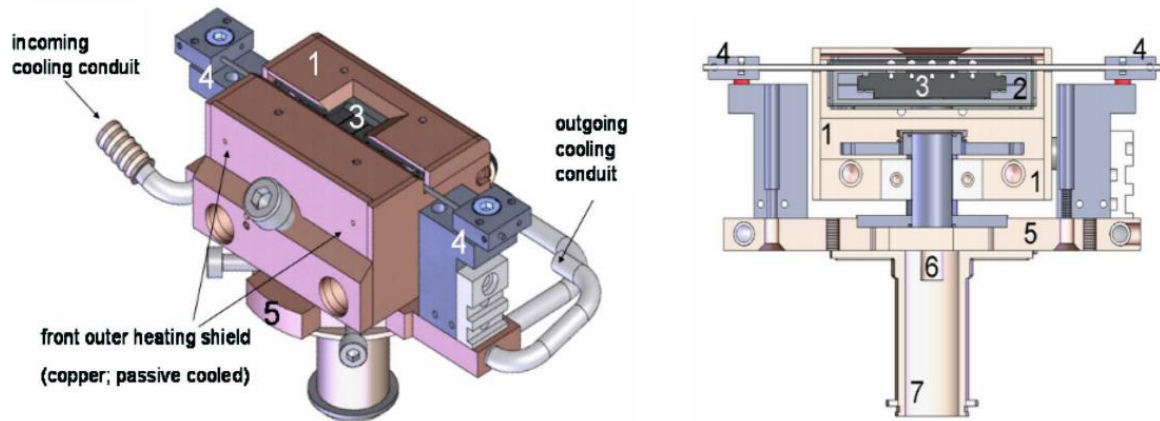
Laser powered heating stage showing the basic outer parts and a cross section of the interior showing: (1) rear outer copper heating shield, (2) internal tantalum heating shield, (3) silicon carbide sample holder, (4) tungsten clamp for specimen mounting, (5) heating stage copper base, (6) optical fibre guidance and (7) goniometer stage adapter [162].
